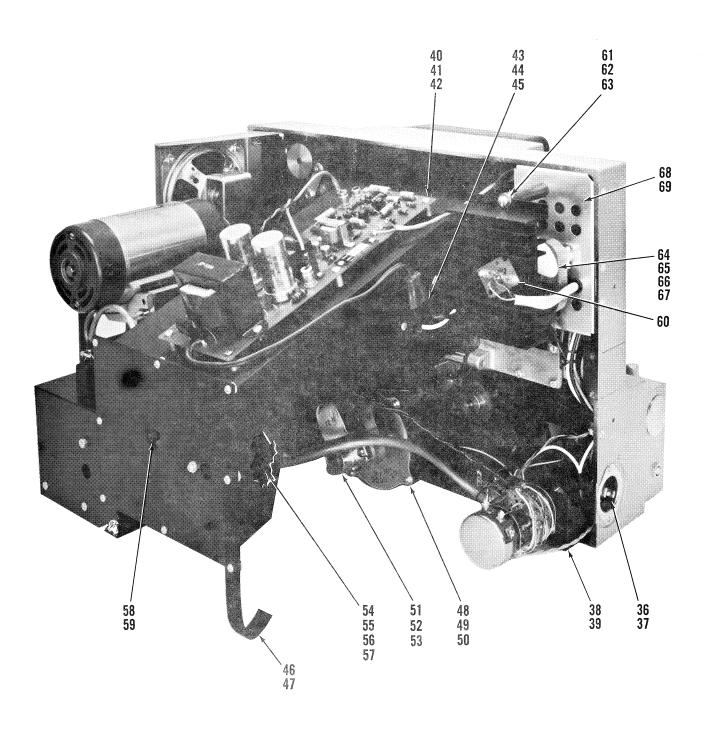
Library Reader Assembly (Sheet 2 of 3)
